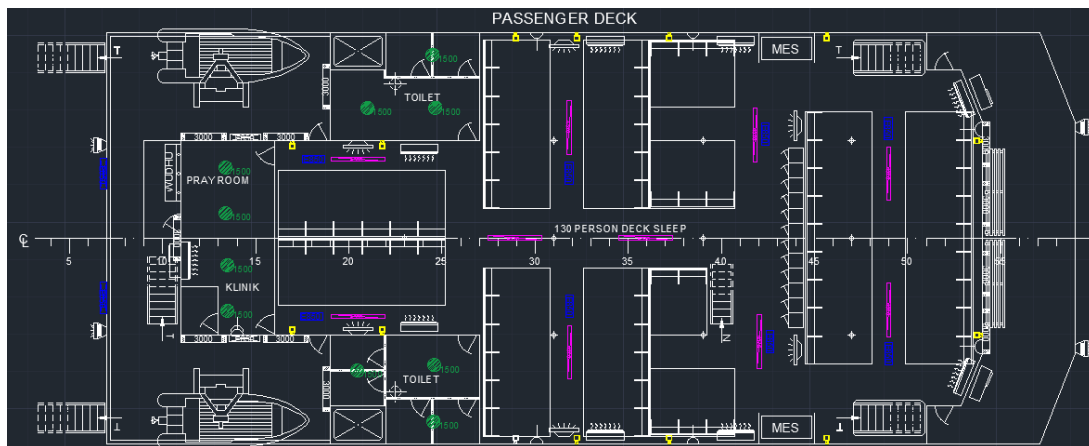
2D Passenger Deck Floor Plan using LED Lamp.
